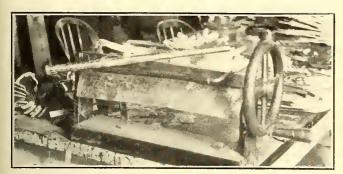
Boston Elevated Shops—Insulating Machine for Forming Tubes
